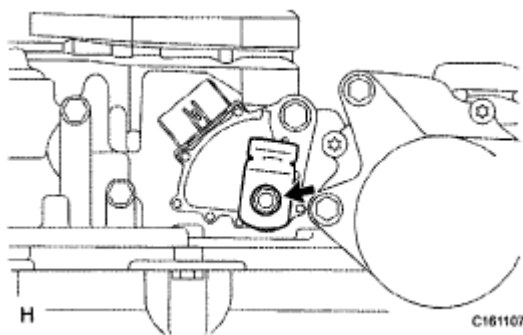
Identifying Transmission Control Shaft Lever RH With Spring Washer And Nut
